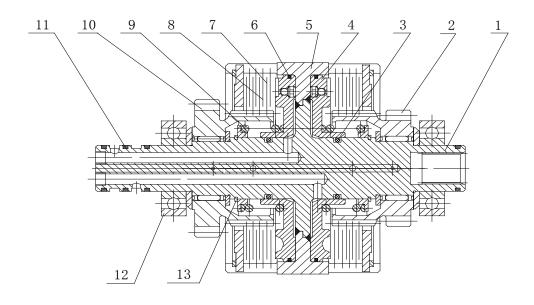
Structure chart of YDS40HST.901 clutch assembly 1-Input shaft 2-Forward gear 3-O-seal ring 4- Piston 5-Clutch shell 6-Seal ring 7-Friction plate 8-Baffle 9-Return spring 10-Reverse gear 11-Seal ring 12-Bearing gear 13-Clamp ring
